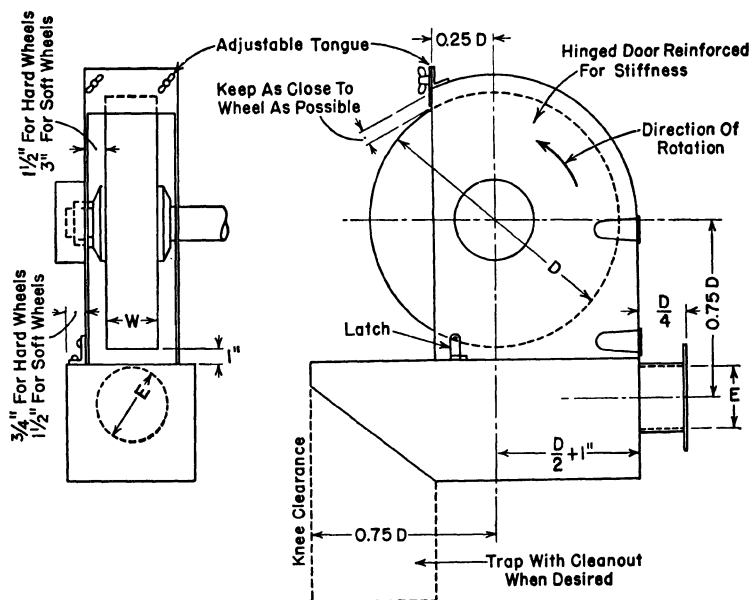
Standard Buffing and Polishing Hood (*Courtesy AFA*)
